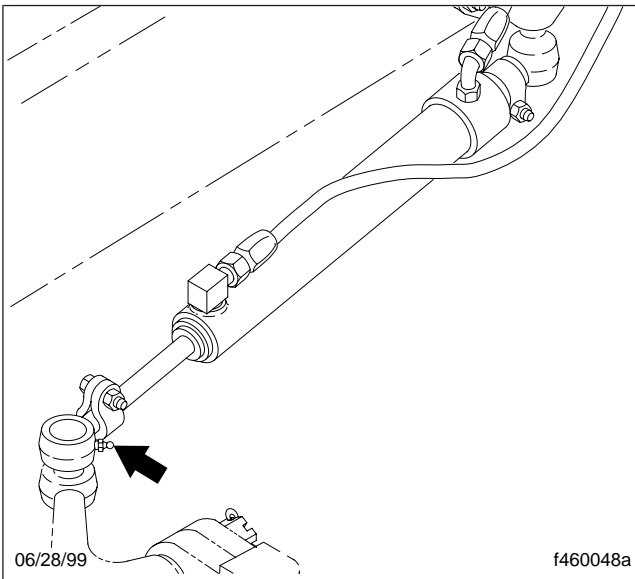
, Power Steering Cylinder Grease Fitting (axle steering arm end)
